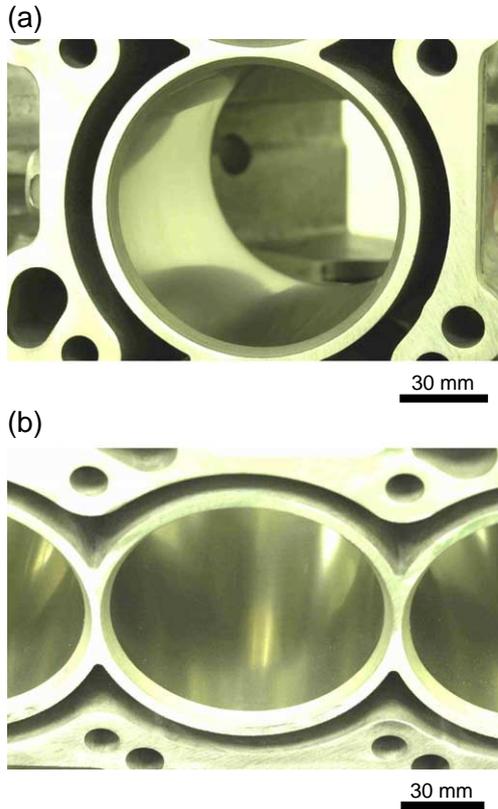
Surface appearance of sprayed bore after honing finishing.
